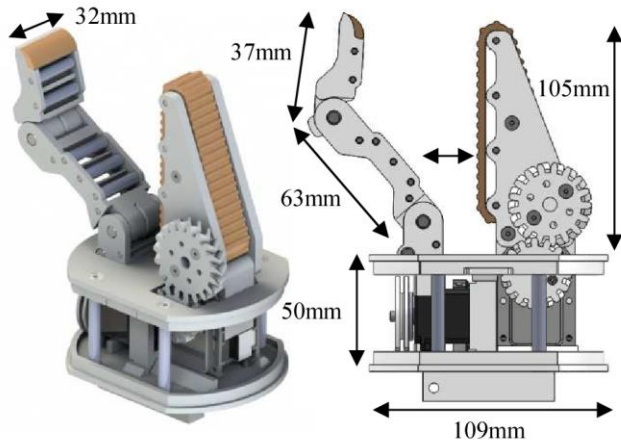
CAD dimensions for the active surfaces gripper. The final prototype is comparable in size and weight (466g) to existing commercial and open-source research end effectors
